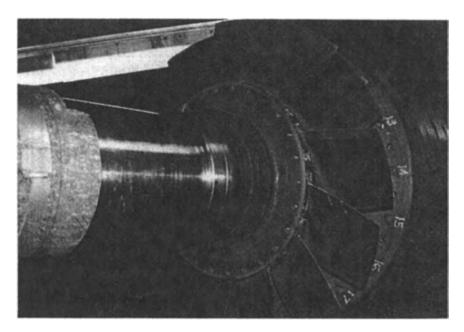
[R04] A 2-pole cylindrical rotor with its axial fan having an overall diameter smaller than the diameter of the retaining rings.
